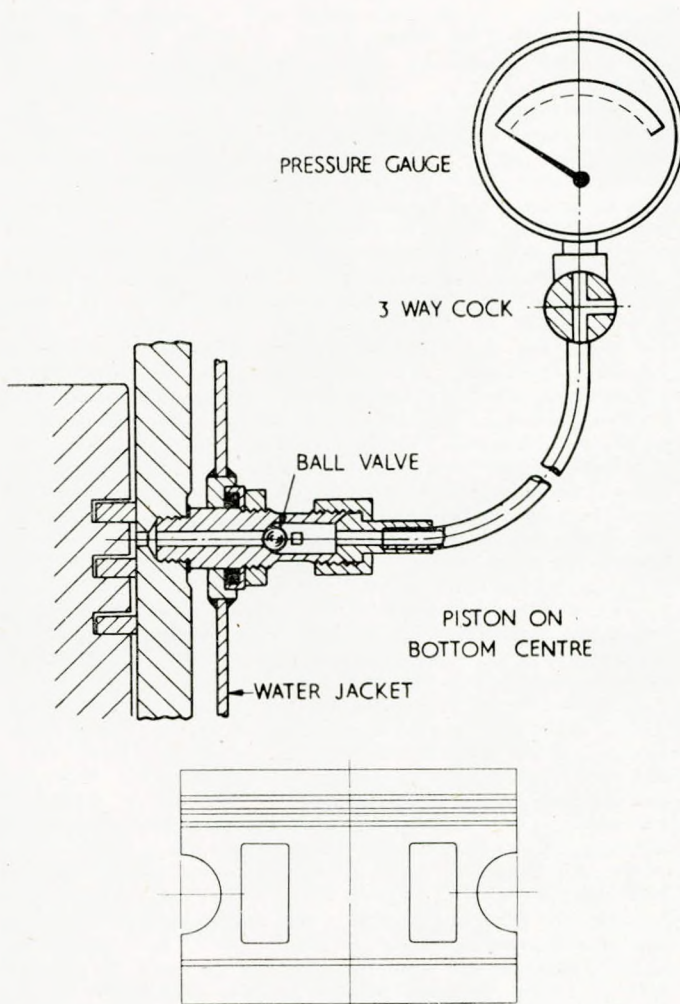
Blow-by indicator and expanded view of half a piston showing a local milled relief $\frac{1}{8}$ inch deep in lieu of oval turning. The other side is identical
